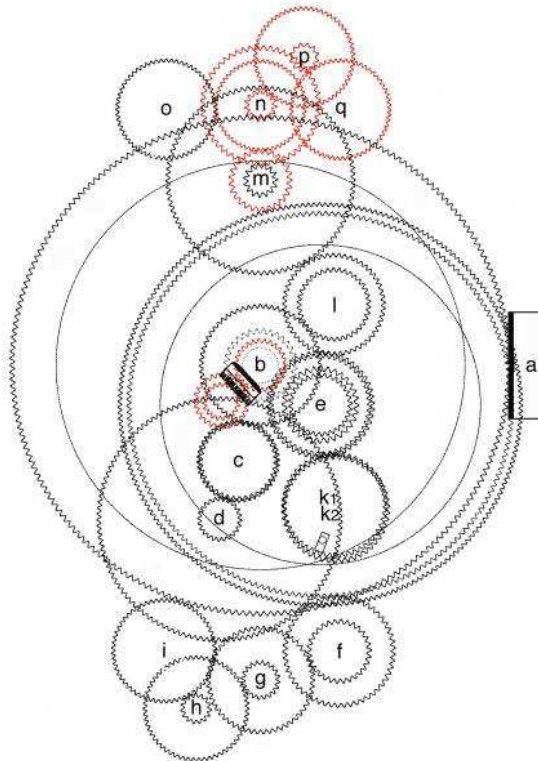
Top view of the schematic gearing diagram of the Antikythera Mechanism model by (Freeth et al., 2008). This diagram shows the complexity of the gearing. Gears in black are visible in the X-ray evidence, gears in red are conjectured in order to complete the model.
